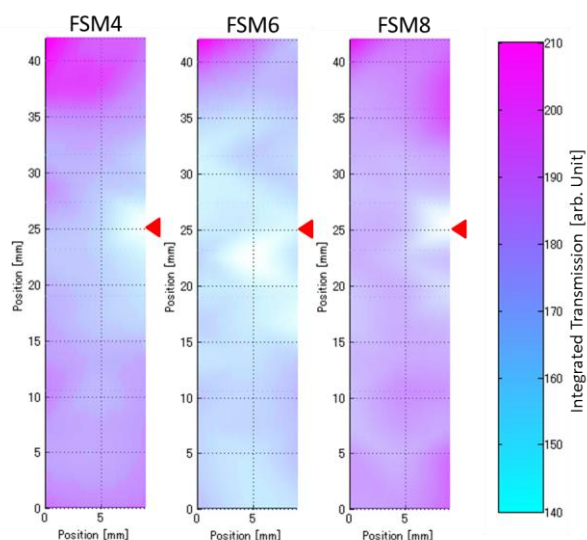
Transmission images for the friction stir welding (FSW) samples of Inconel 600 alloy.
